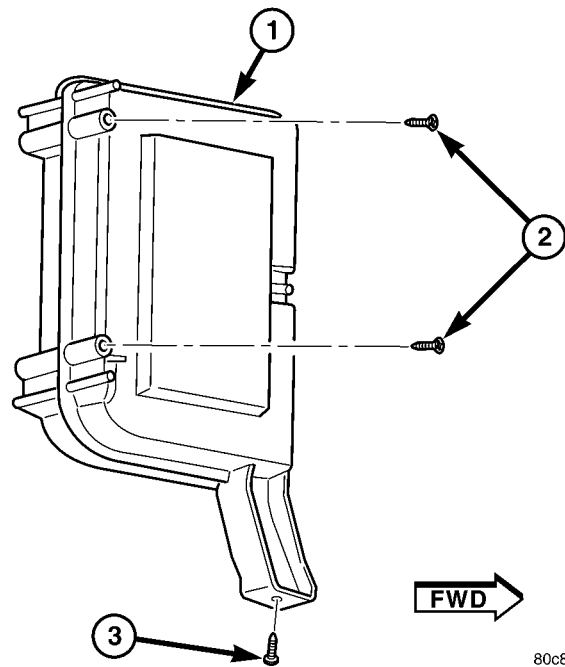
VACUUM RESERVOIR REMOVE/INSTALL
